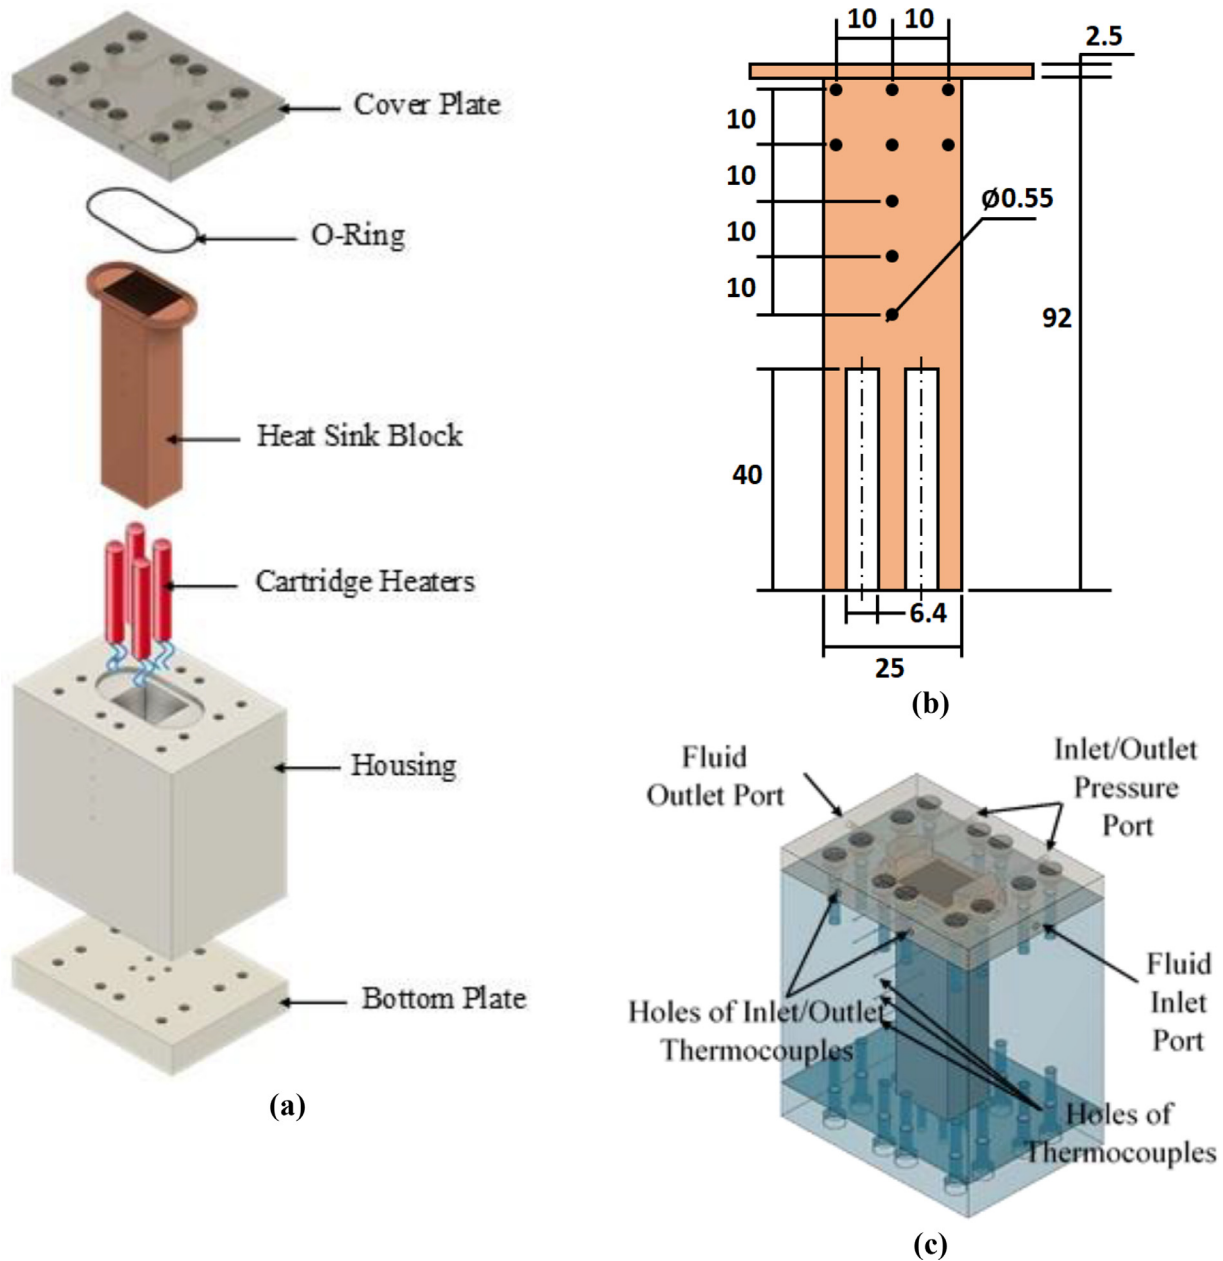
Test section details (a) Exploded drawing and (b) Heat sink block, dimensions in mm [28] (c) Overall assembly.
